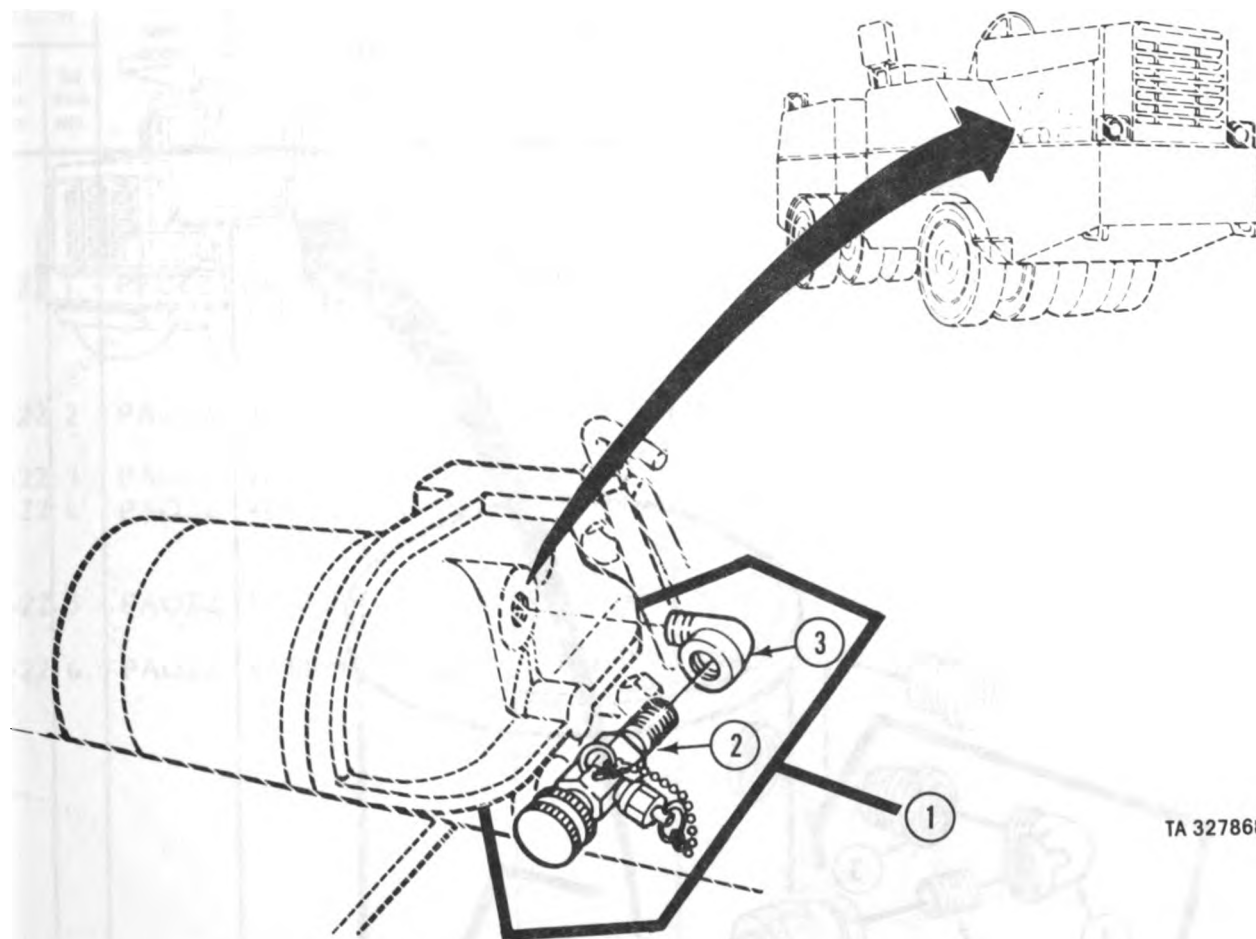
Engine Oil Sampling Valve Kit/830MB Tractor
